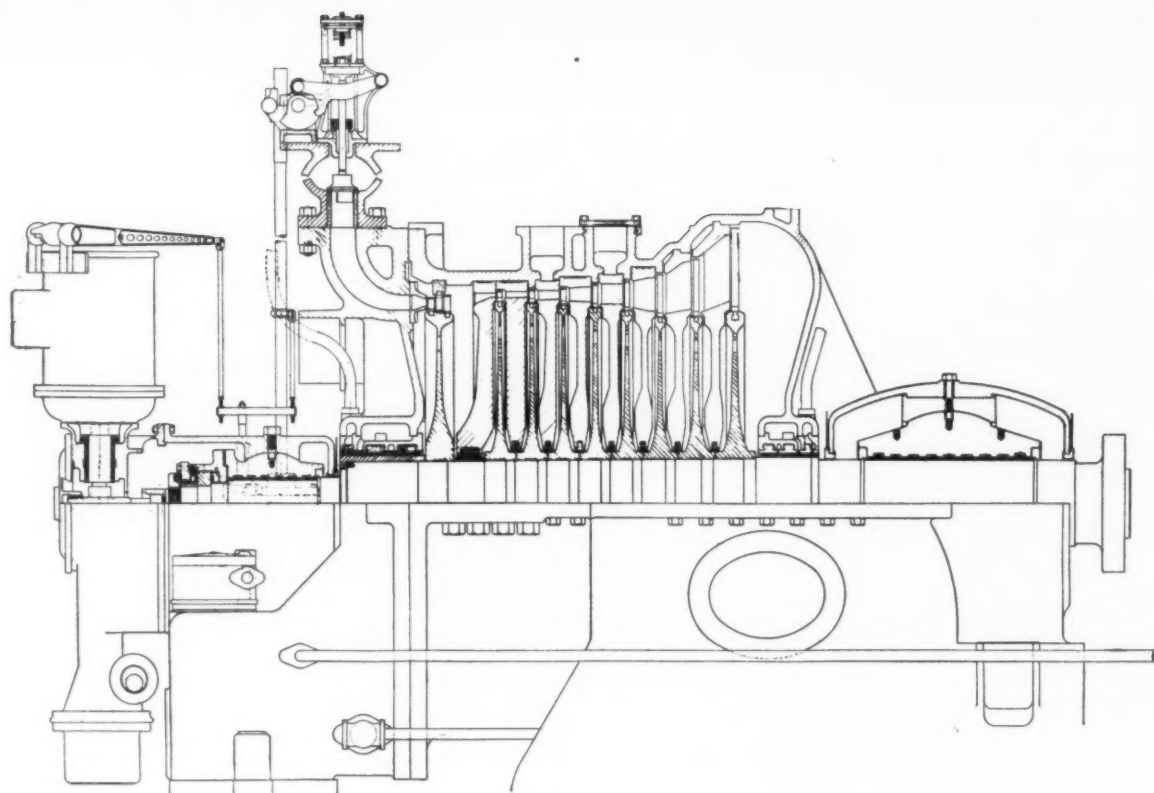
7500-KW, 1800-RPM, NINE-STAGE TURBINE
